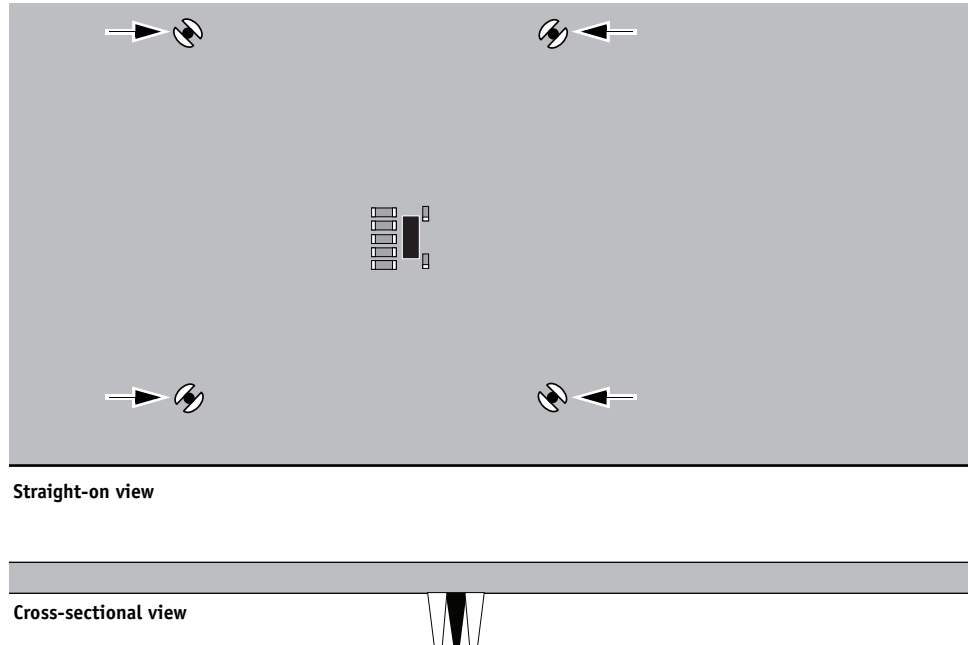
Inspecting the cooling assembly pins on the underside of the motherboard
